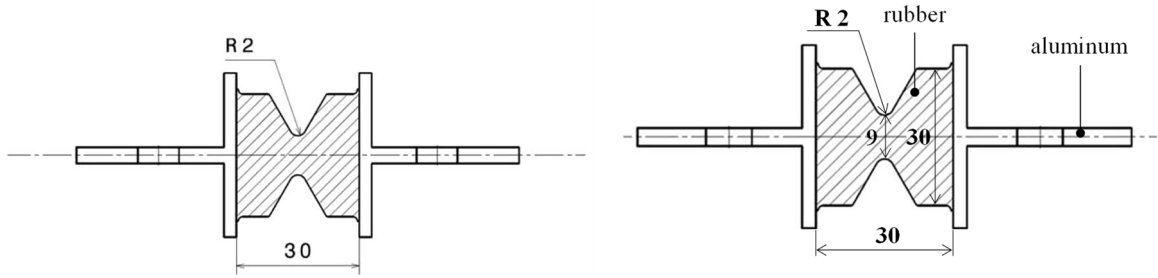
Hourglass-shaped specimen (AE2) used (dimensions in mm).
